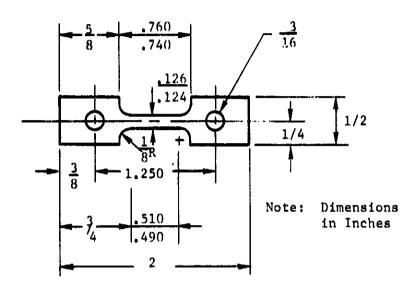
Design of tensile test specimens machined from sheet coupons exposed in 1040° C (1900° F) lithium loop.
